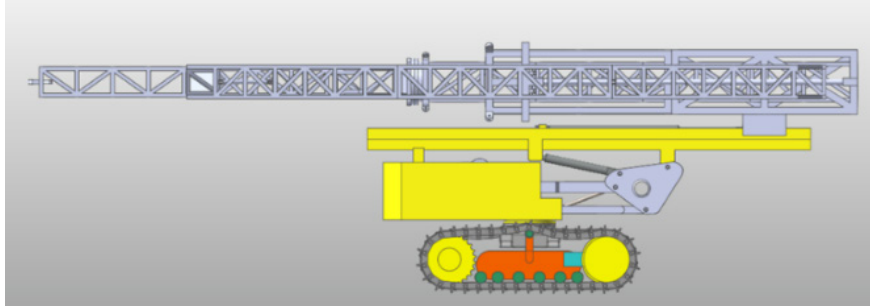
The dynamic model of mobile automatic lifting and landing tower assembly device with floor-typed double horizontal arm holding pole.
